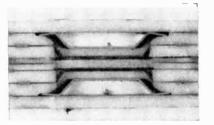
Cross-section view of twin triode ceramic wafer tube. The three top shapes are repeated in the bottom half of the tube in reverse order. Simple wafer design makes stacking and assembly easy
